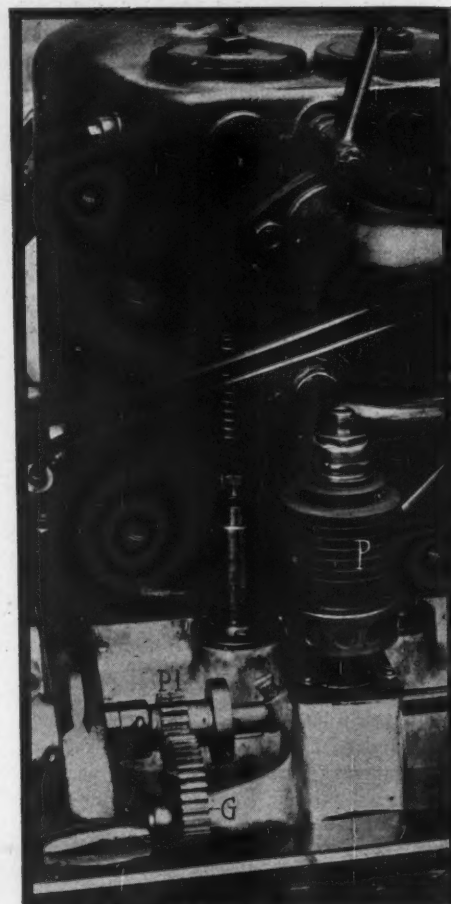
POWER TIRE PUMP AND ITS DRIVING GEARS
